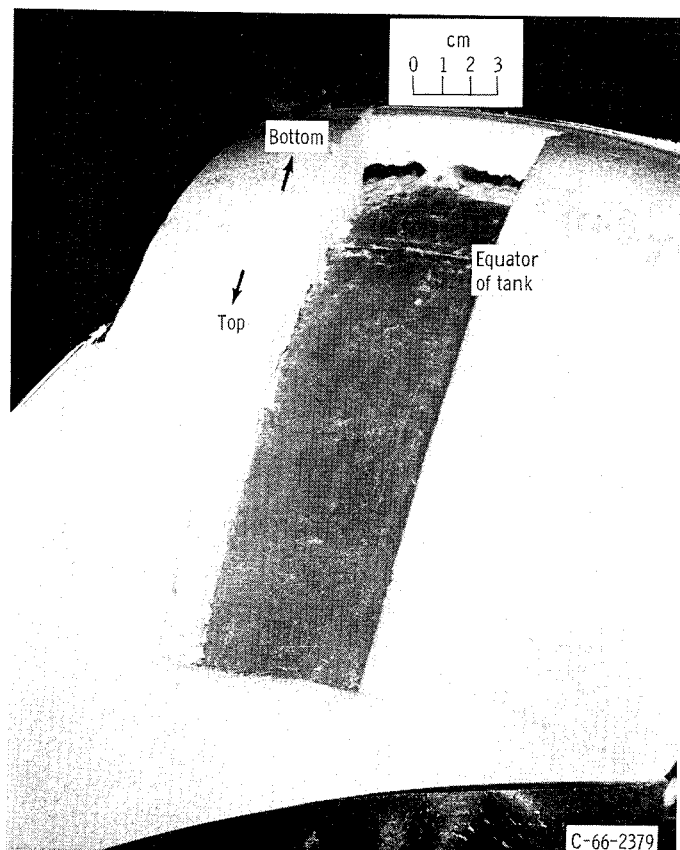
Typical voids in foam insulation adjacent to tank wall (tank 1).
